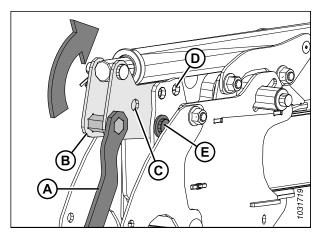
Fore-Aft Cylinder Adjustment Type 1 – Forward Position
